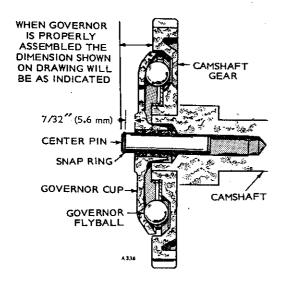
GOVERNOR CUP (CROSS SECTIONAL VIEW)
